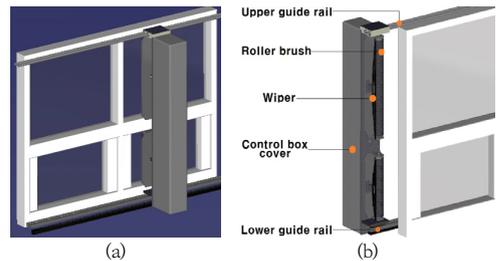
A concept of a guide rail fixed cleaning device (a) Outer view (b) Inner view
